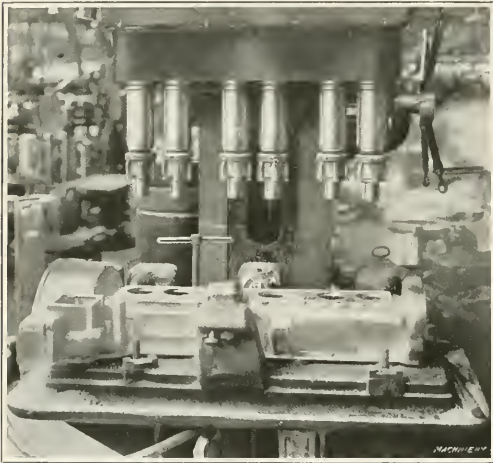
Foote-Burt Boring Machine on which Cylinder Holes are machined in Upper Halves of Crank-cases
